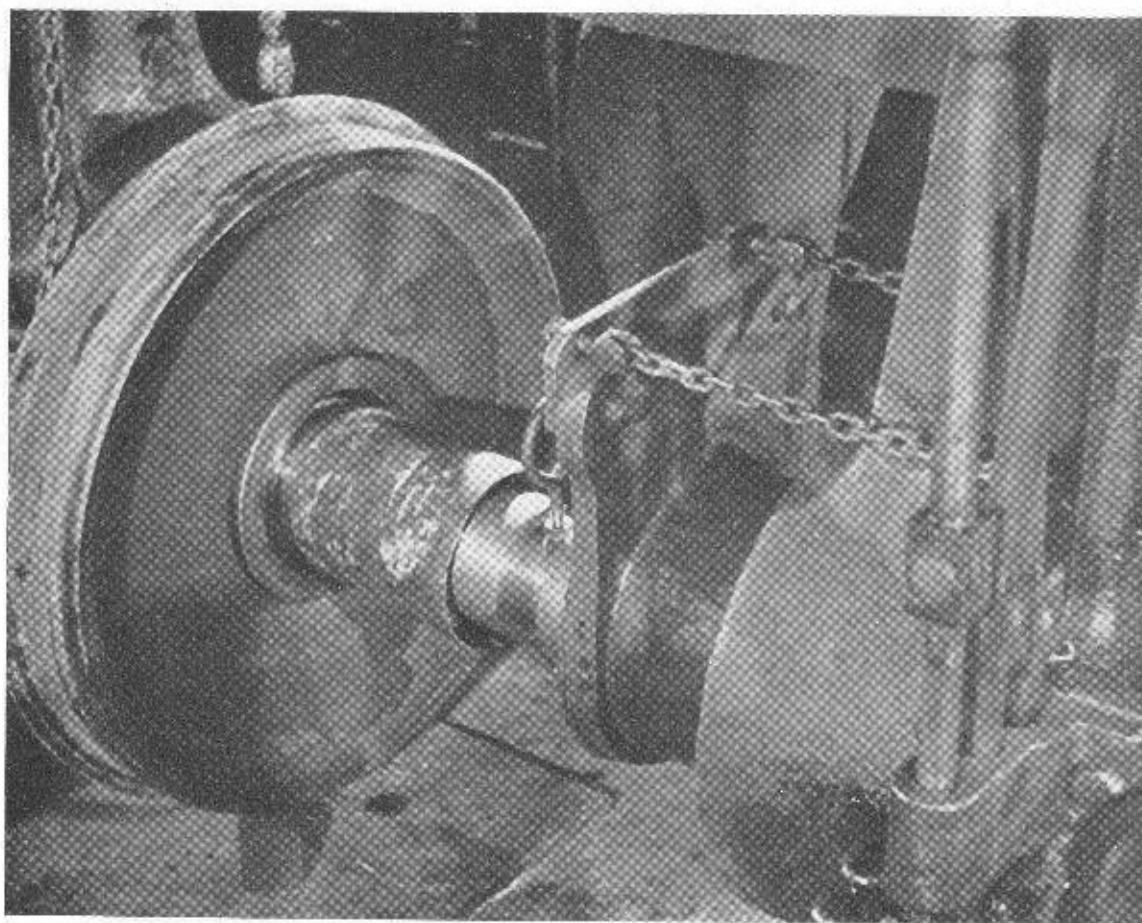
Car wheel being removed from the journal in a wheel press, without disturbing the bearing inner race. The inner race has been covered with a sheet steel cylinder for protection.
